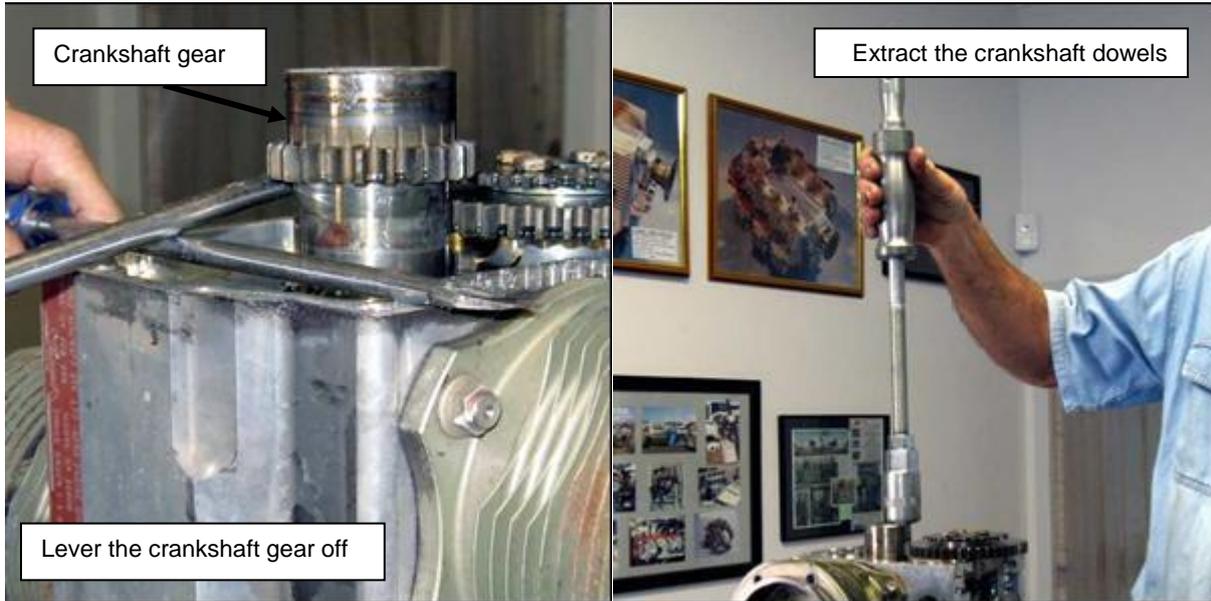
Removing Crankshaft Timing Gear & Dowels
